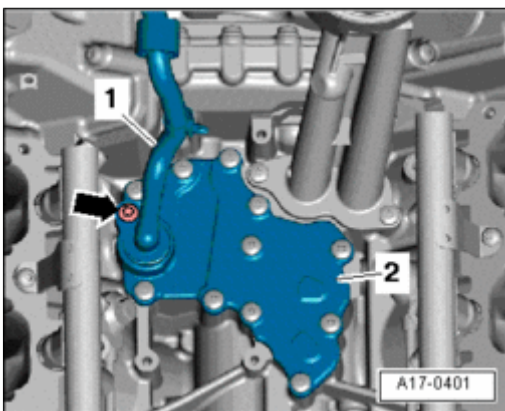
Removing Bolt And Crankcase Ventilation Hose From Cover
